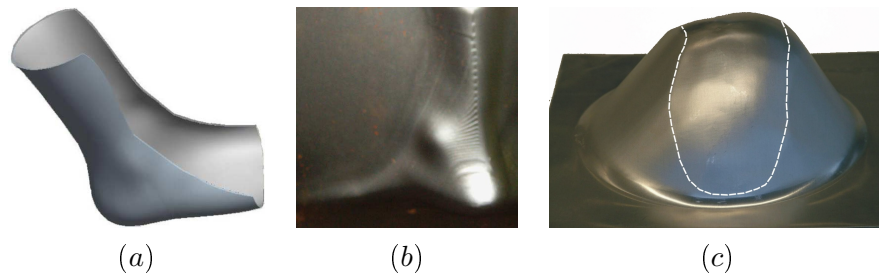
Medical parts; (a) CAD model of an ankle support and (b) final product [AMB05a]; (c) cranial plate [DUF05a].
